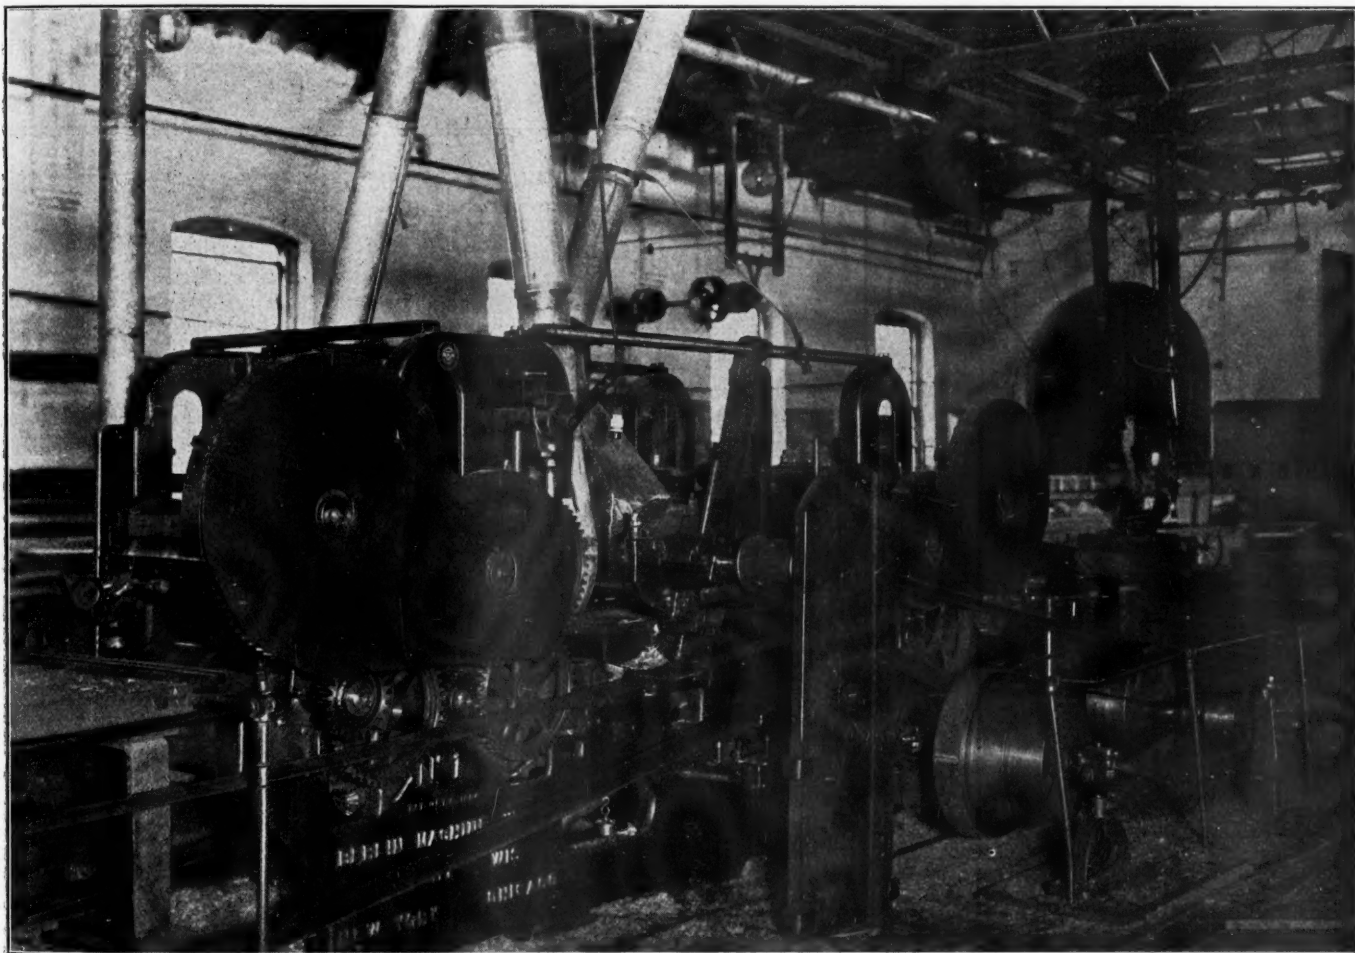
Timber Planer Protected by Boiler Plate Guards and Railing.
